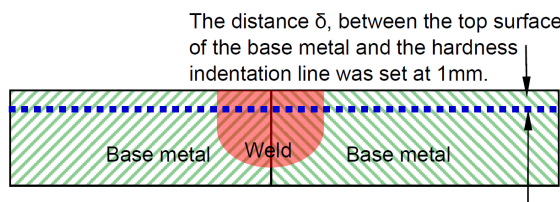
Illustration of location of the indentation line in the welding specimen.
